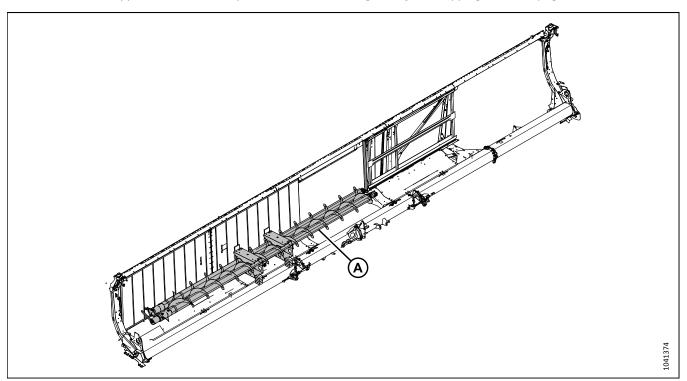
Double-Reel Header with Two-Piece Upper Cross Auger (UCA)
